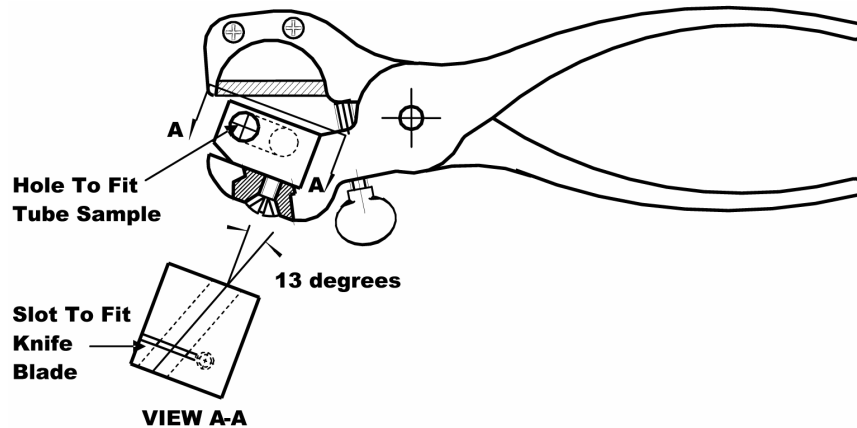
EXAMPLE OF SUITABLE TOOL FOR SPIRAL CUT ADHESION TEST
